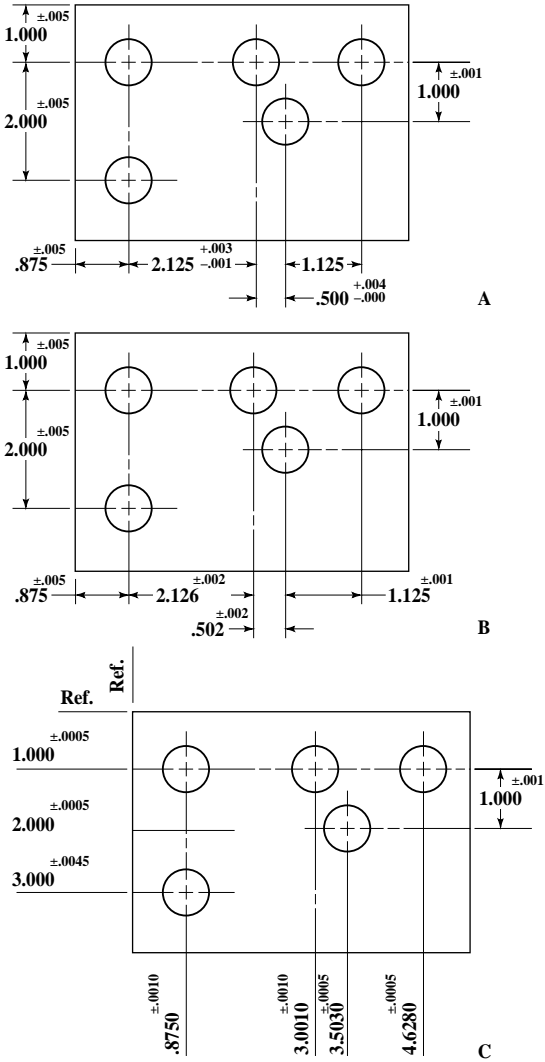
(A) Conventional Dimensions, Mixed Tolerances; (B) Conventional Dimensions, All Equal, Bilateral Tolerances; and (C) Coordinate Dimensions
